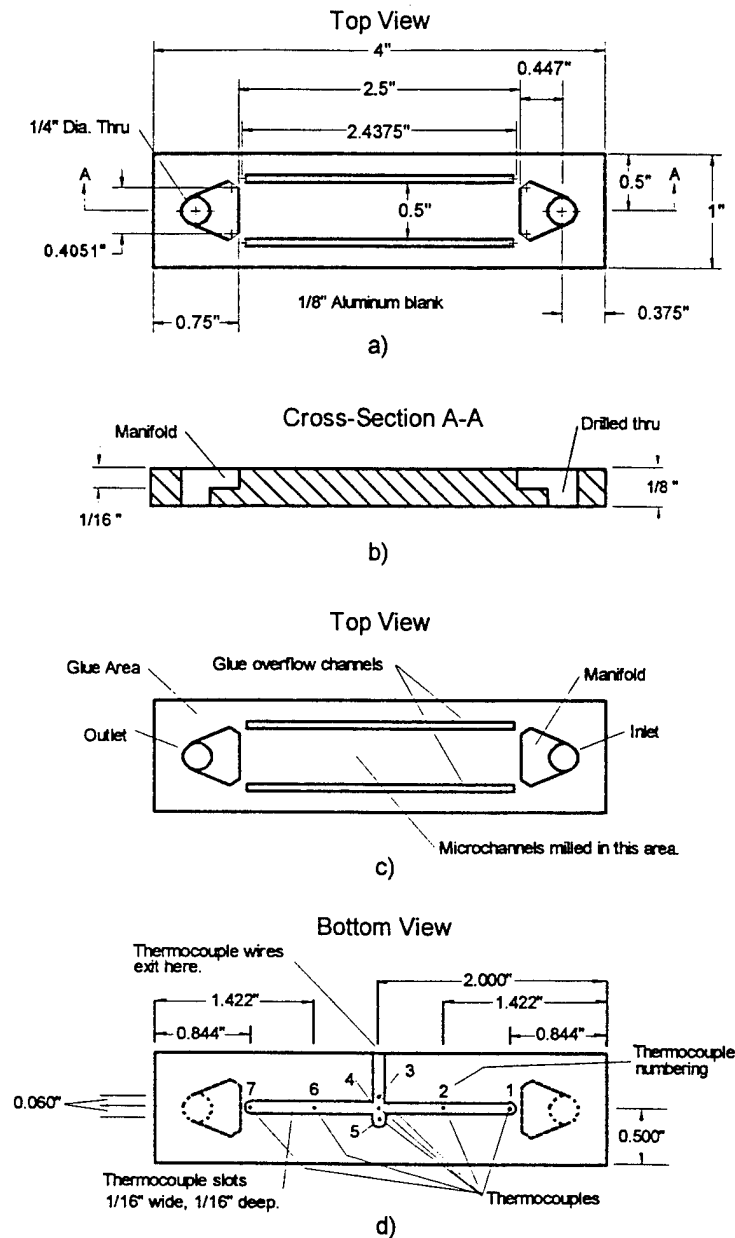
Test Section; a) Dimensions, b) Cross-section, c) Component description, and d) Thermocouple numbering and locations, approximately 0.01" beneath channels.
